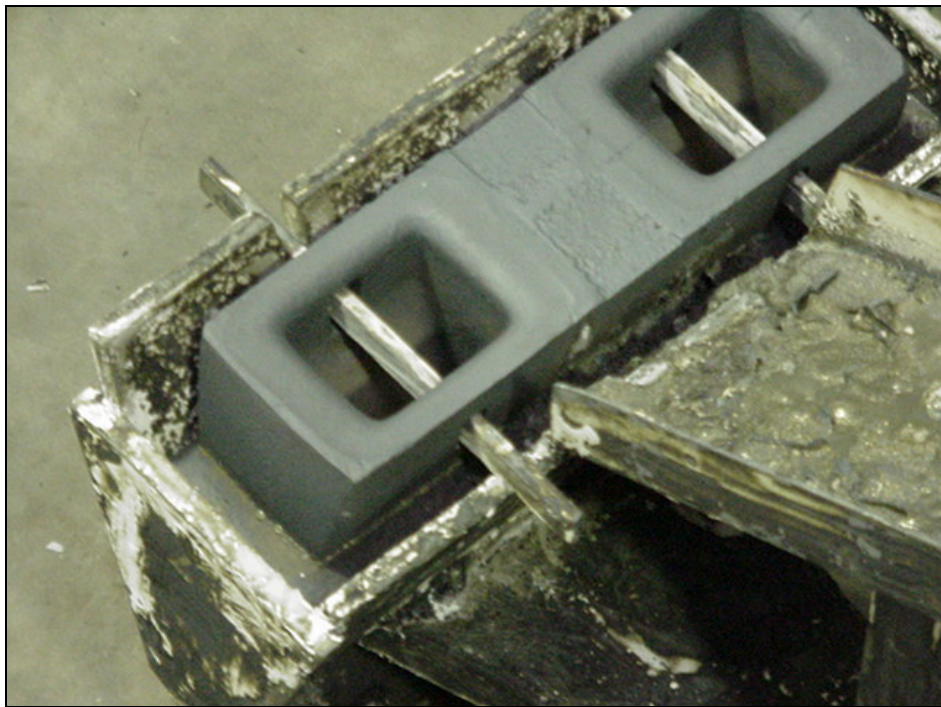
View of completed wide bucket lip still in the mould after casting
